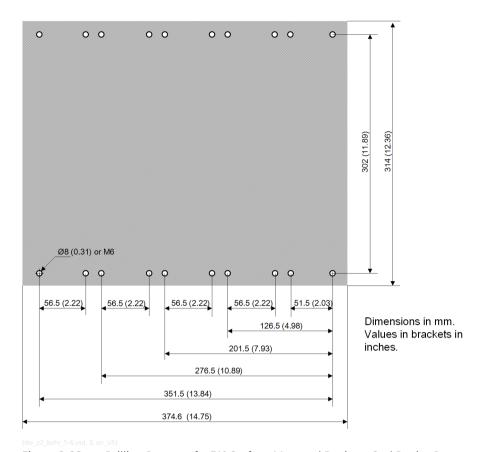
Drilling Pattern of a 5/6 Surface-Mounted Device – 2nd Device Row
